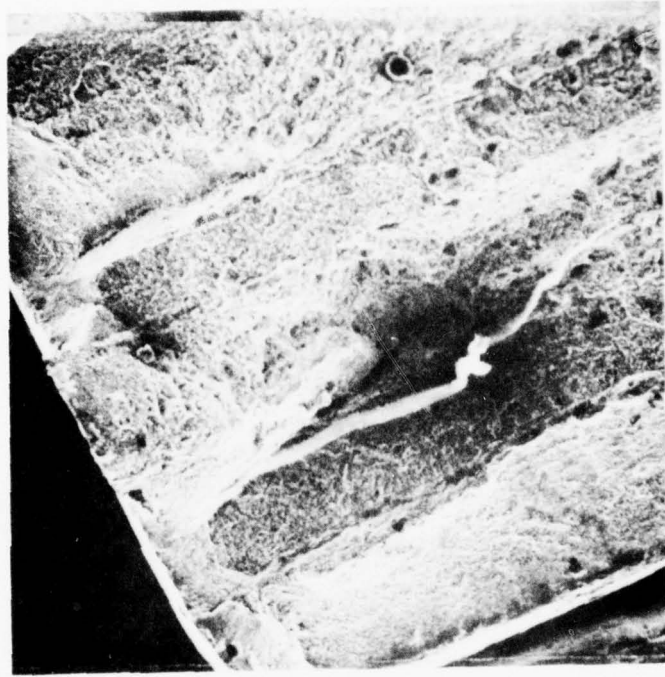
A. A Micrograph Showing the Fracture Surface of Specimen D 353.
